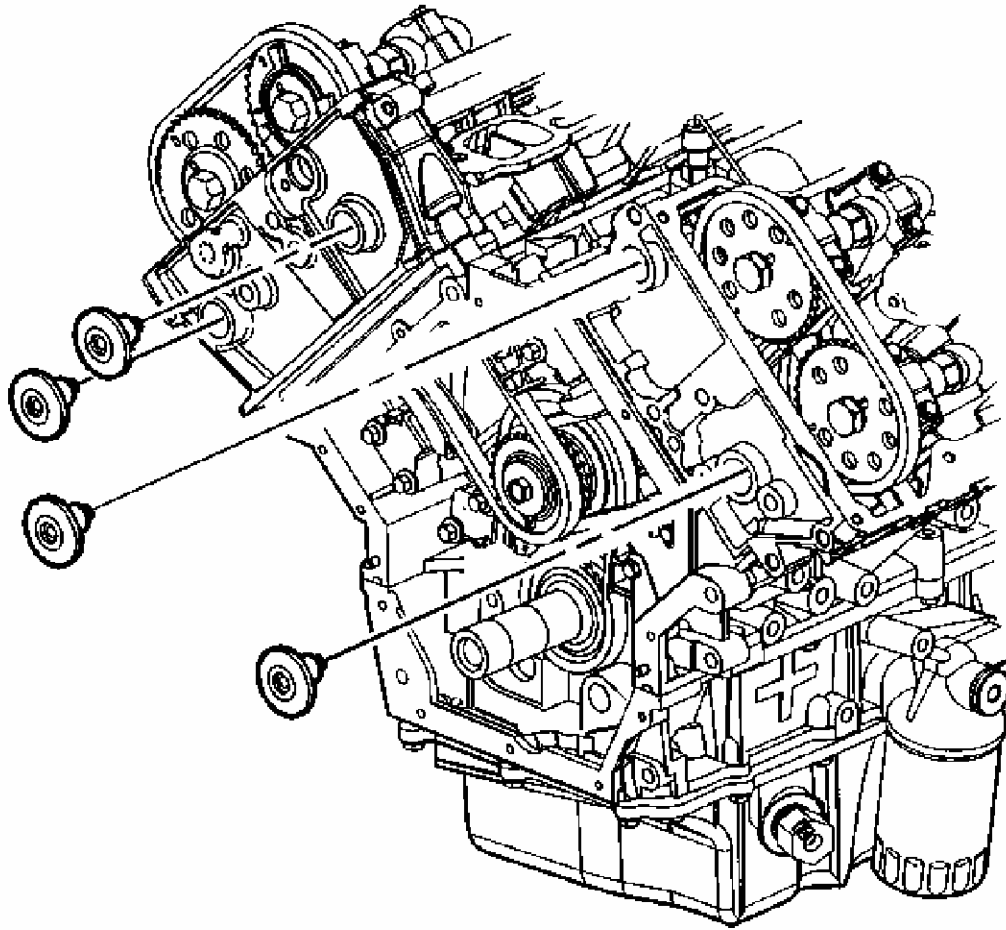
Identifying Cylinder Head Core Hole Plugs
